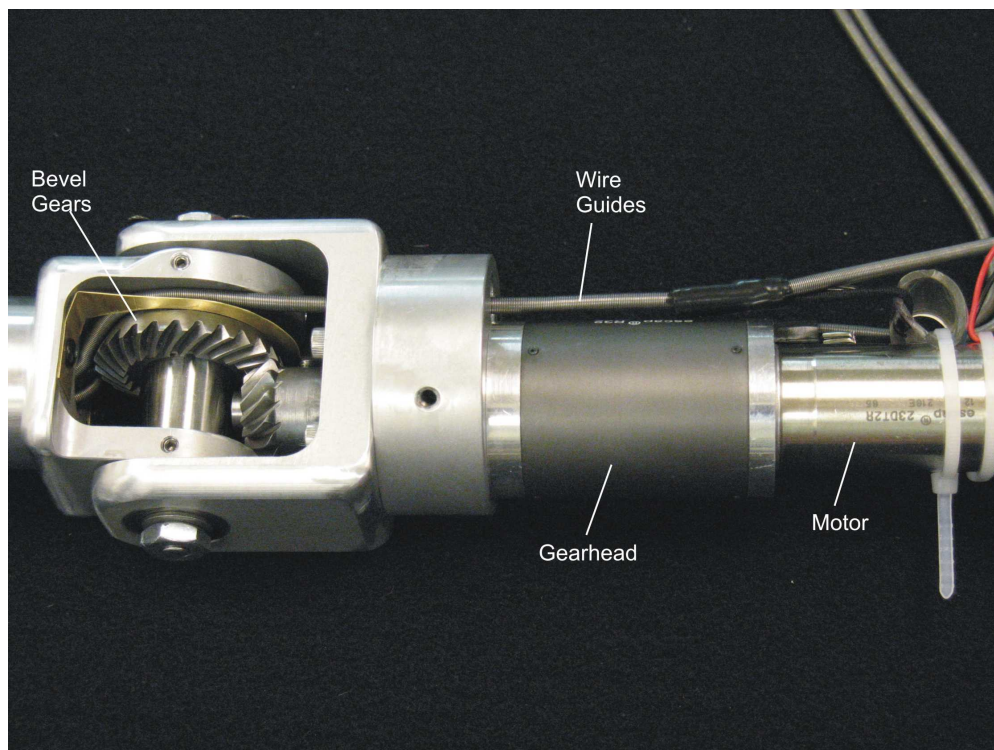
Joint 2 assembly showing motor, planetary drive train, bevel gears, and wire guides.
